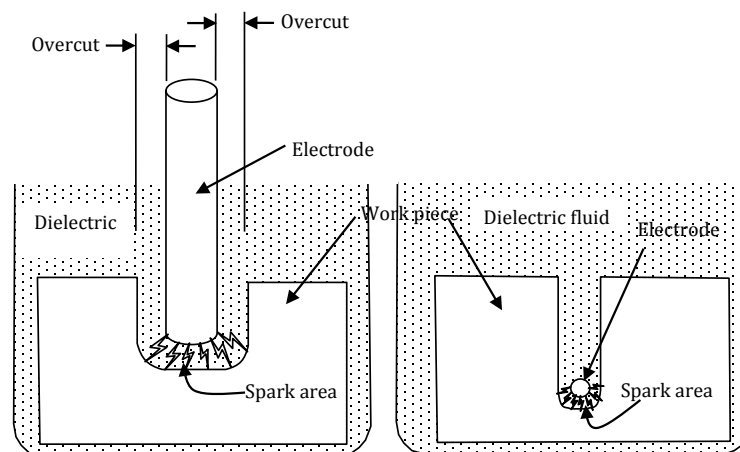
SCHEMATIC VIEW OF DYE SINKING EDM (LEFT) AND WIRE CUTTING EDM (RIGHT)
